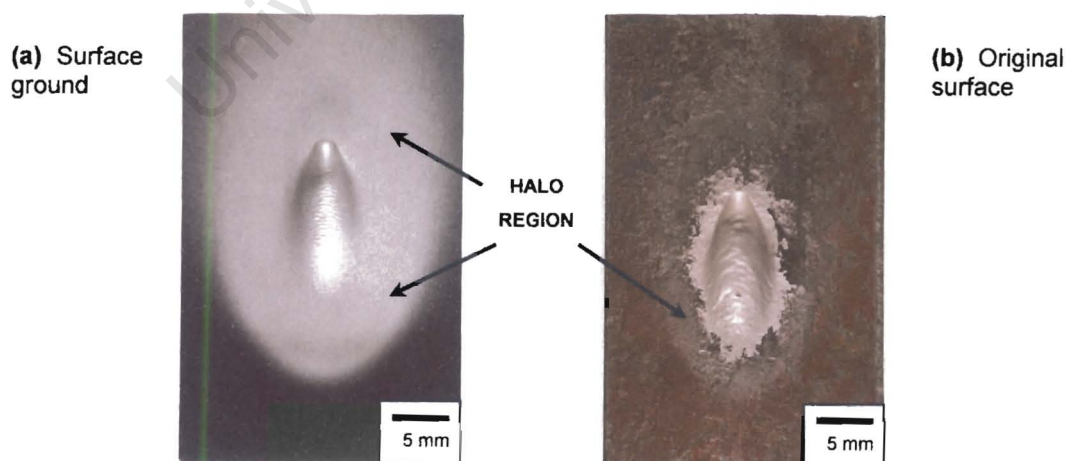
Surfaces of 1.6580 steel specimens as eroded in figure 4-19.
